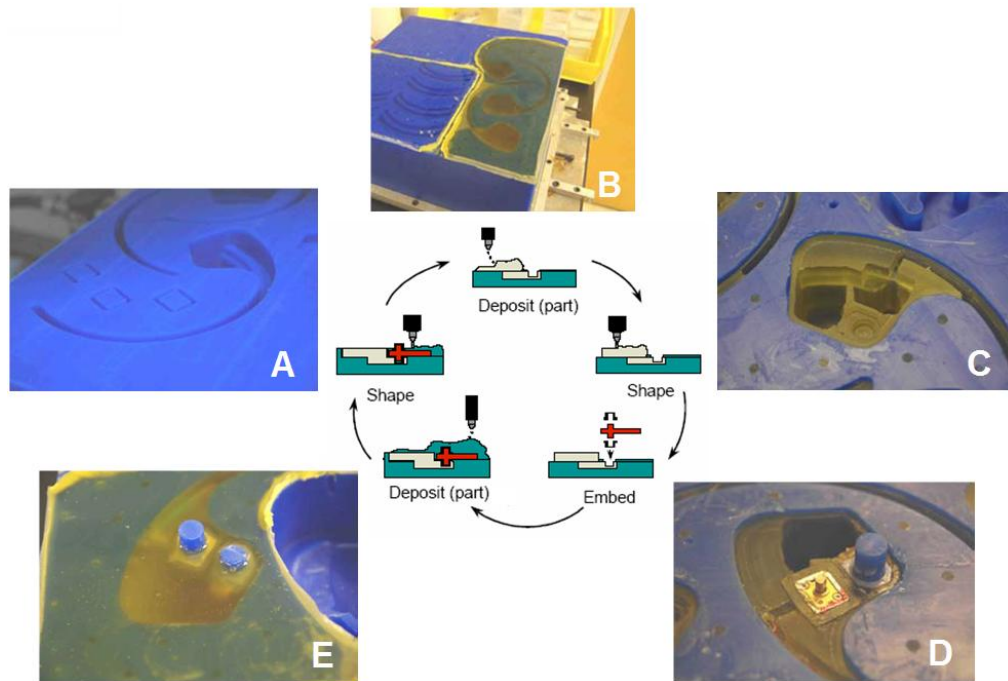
A step-by-step outline of the shape deposition manufacturing process. (A) Machine the negative of the leg shape into a block of machinable blue wax, (B) deposit part material (TP-4000 epoxy), (C) Machine pockets for components into cured part material, (D) insert components, (E) deposit more part material to fully embed components and then machine finished parts out of the mold and assemble (see Figure3.10)
